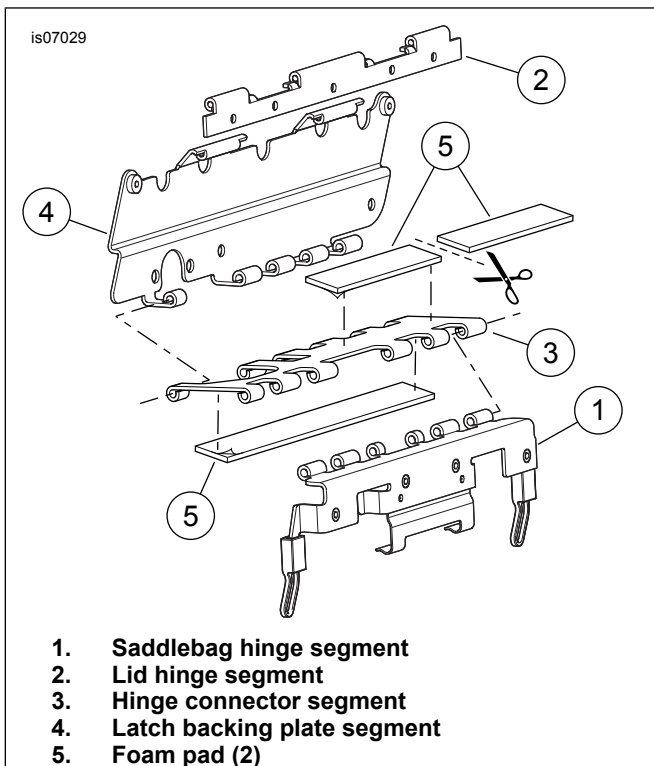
Install Foam Pads to Saddlebag Latch Hinge (Left Side Shown)
